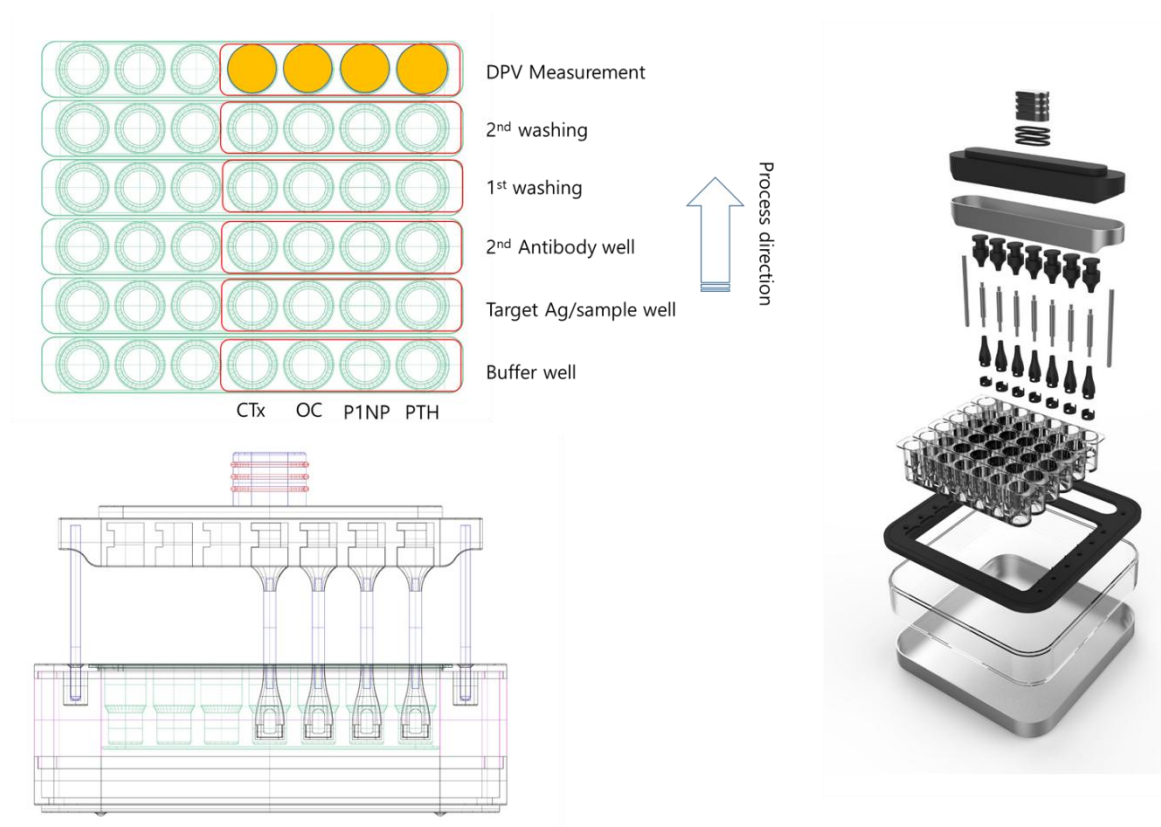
Custom-built 7 x 5 well type for the measurements. Upper left: well plate containing reaction solutions, lower left: membrane holders placed in the wells, right: assembling parts for the holder and plate.
